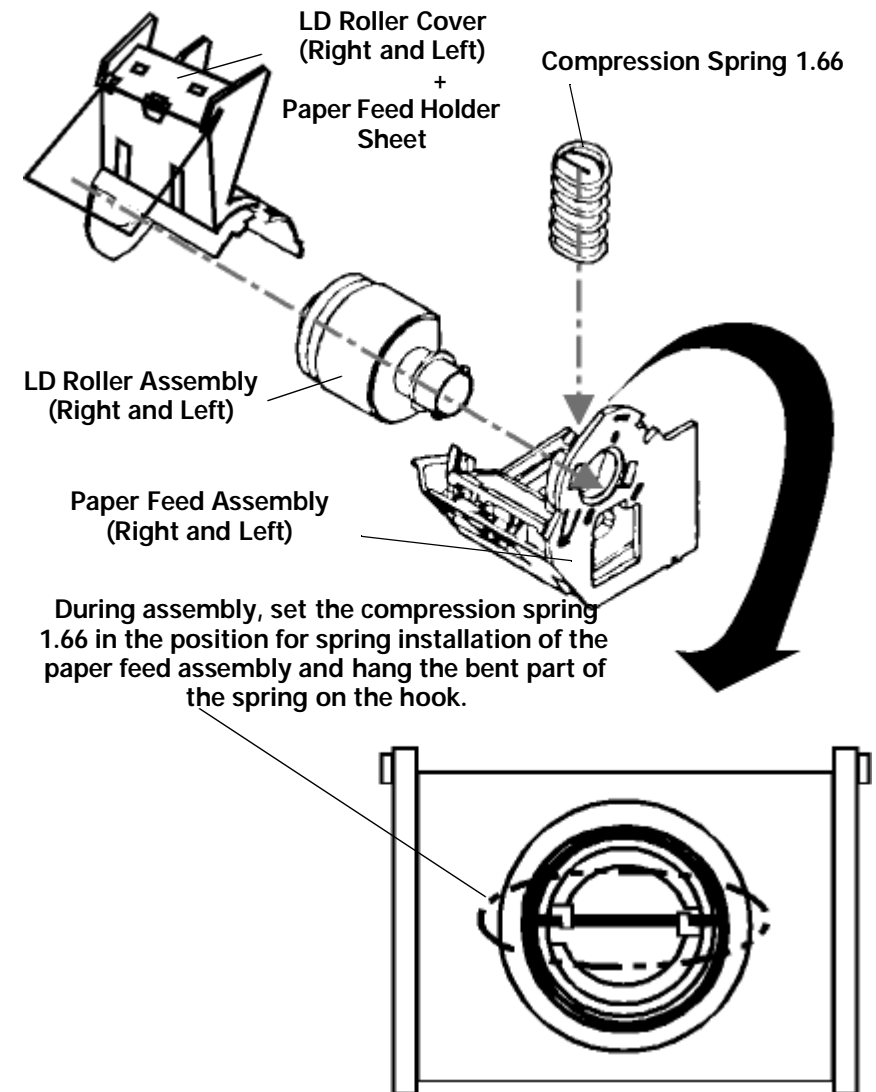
Disassembly of Paper Feed Roller Assembly
